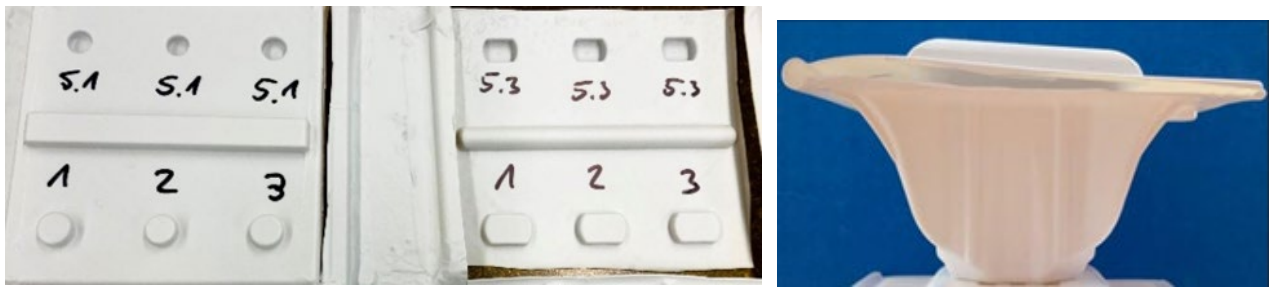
Series for different geometries of clip connections (left), Example of packaging manufactured using thermoforming and 3D printed moulds (right).
